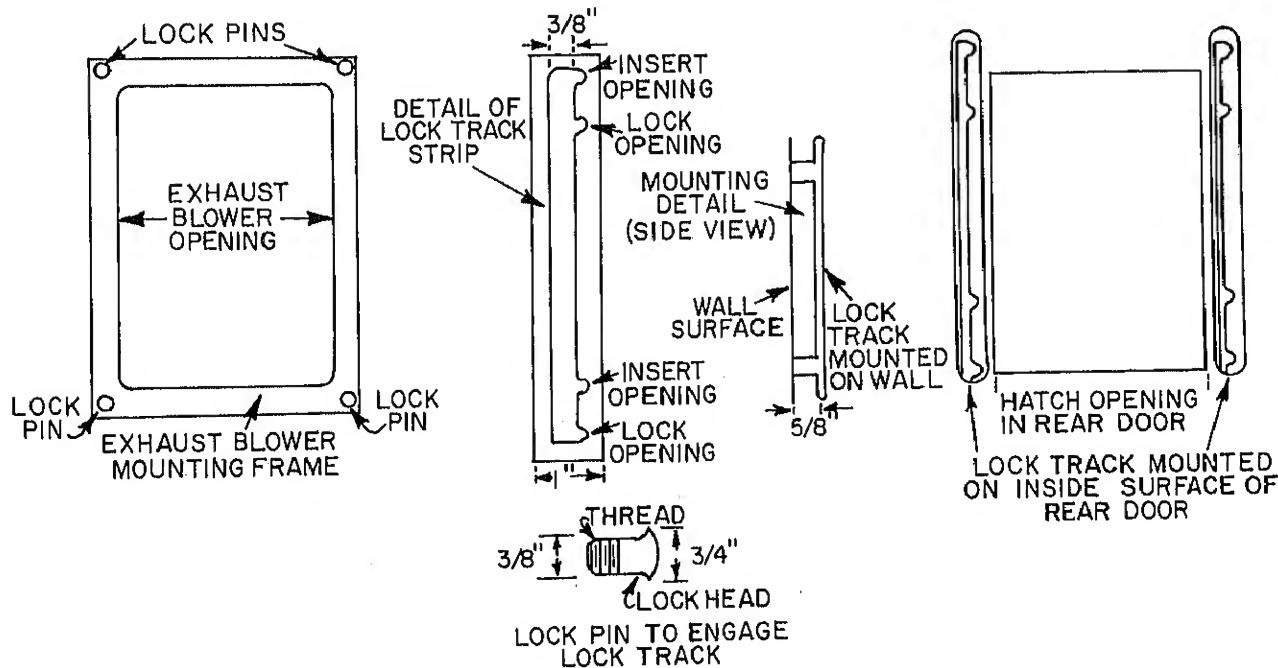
Proposed exhaust blower mounting frame and track.
